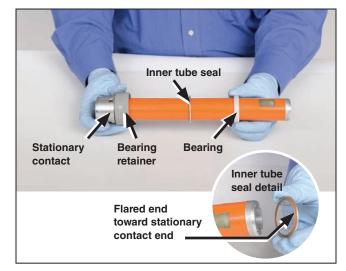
Assemble the inner tube assembly. Detail view of inner seal. Make sure the flared end is pointing toward the stationary contact end of the inner tube assembly.
